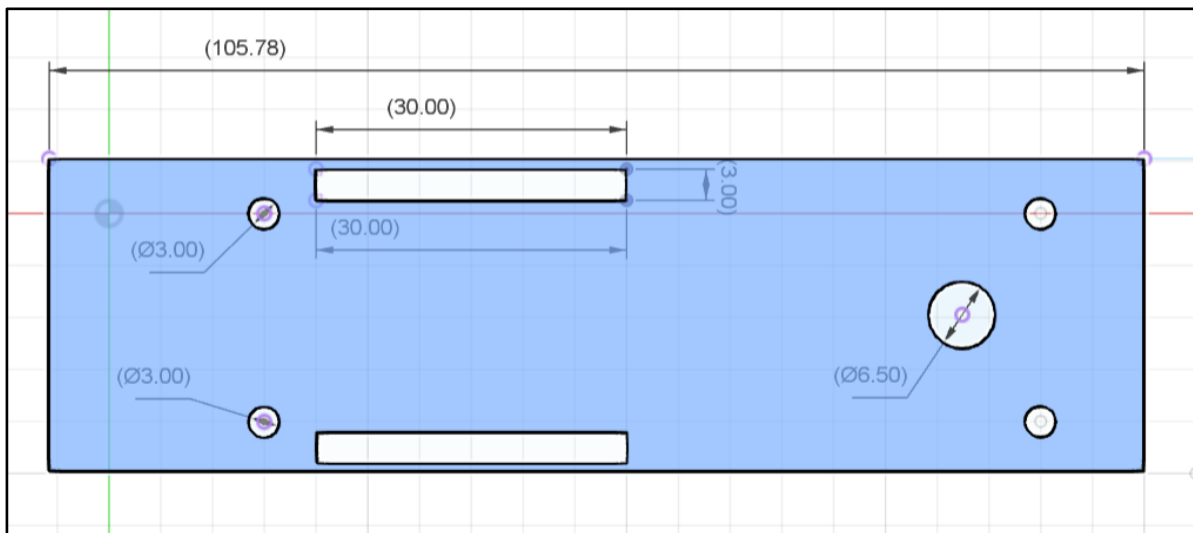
Mounting plate design sketch (NB: All the measurements are in 'mm')
